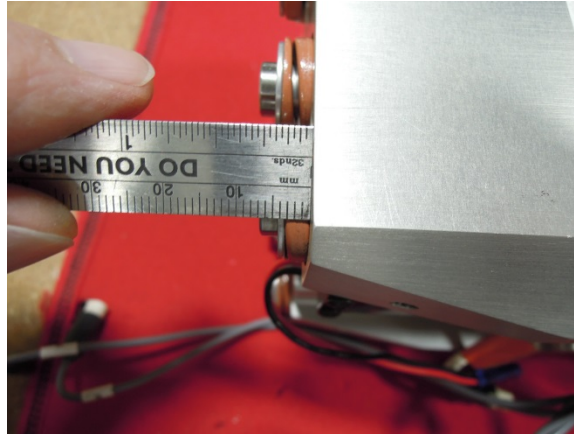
Spring protrusion on the femur knee block should be 3 mm
